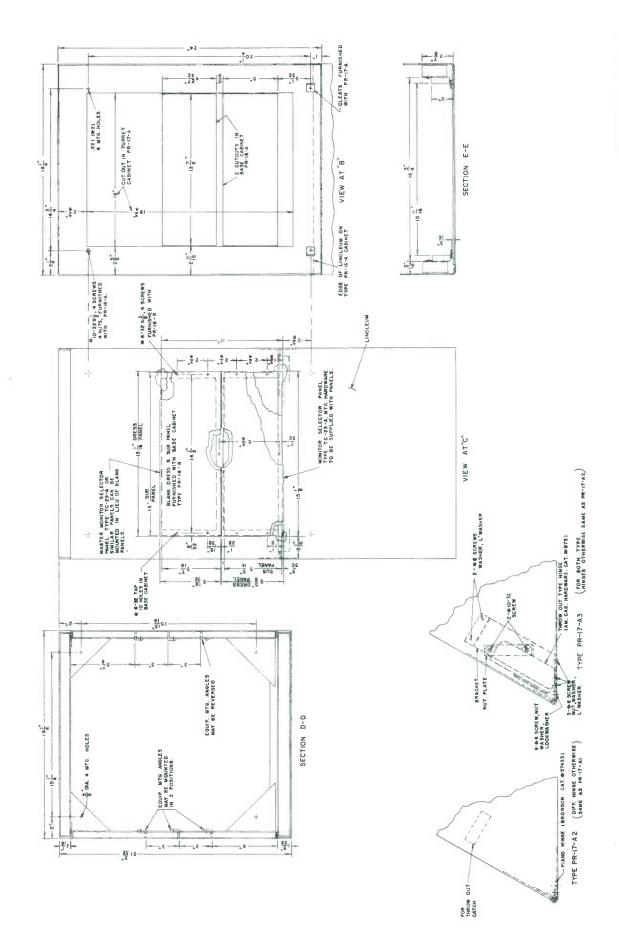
B Cabinets, Types PR-17-A and PR-16-A, -B, -C, Outline and Clearances Drawing
